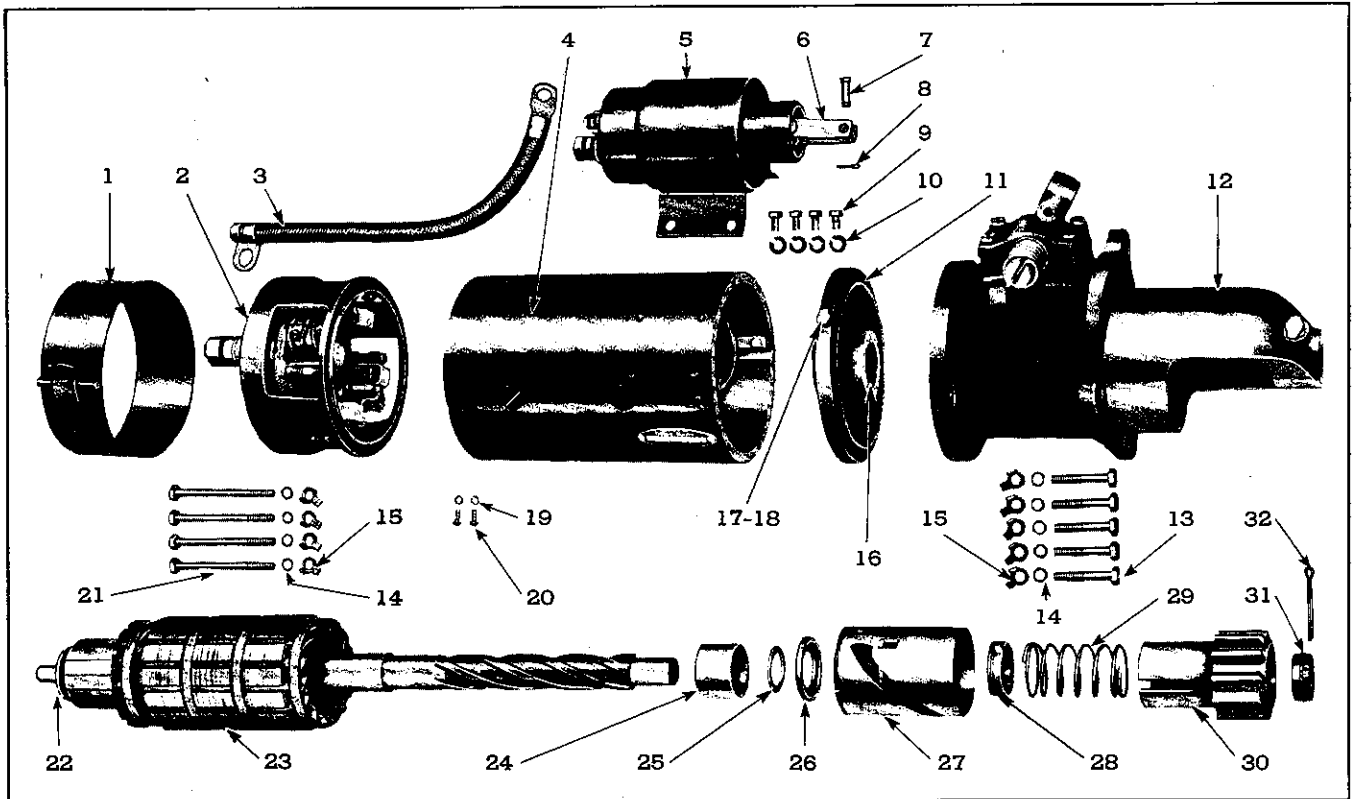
Starting Motor Disassembled into Main Sub-Assemblies.
